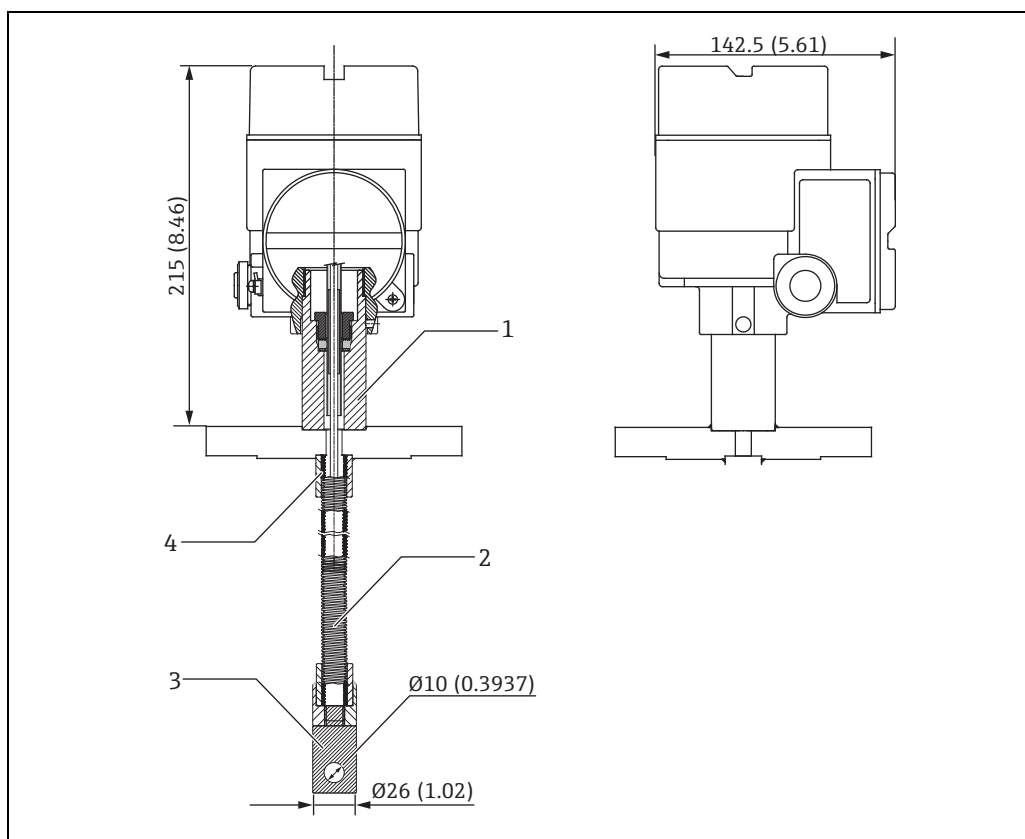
NMT532 dimensions, Unit of measurement: mm (in)
